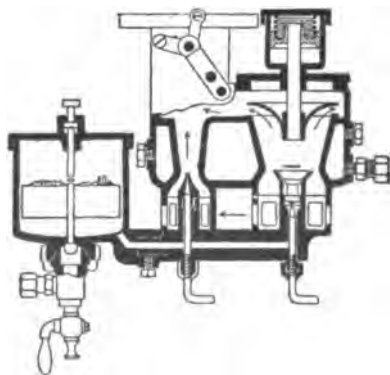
A carburetor of the side float and "double jet" type. The hand adjusted needle valves are shown at bottom of carburetor.
